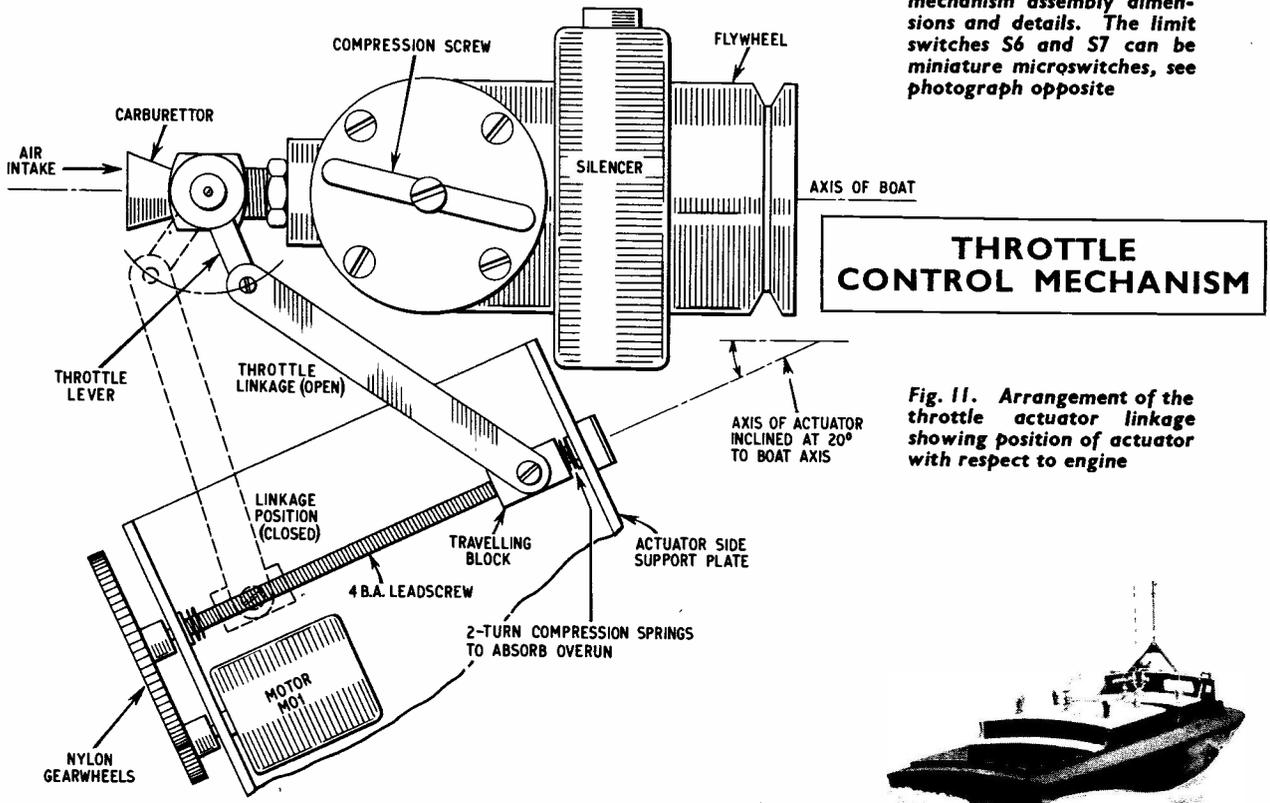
Arrangement of the throttle actuator linkage showing position of actuator with respect to engine
